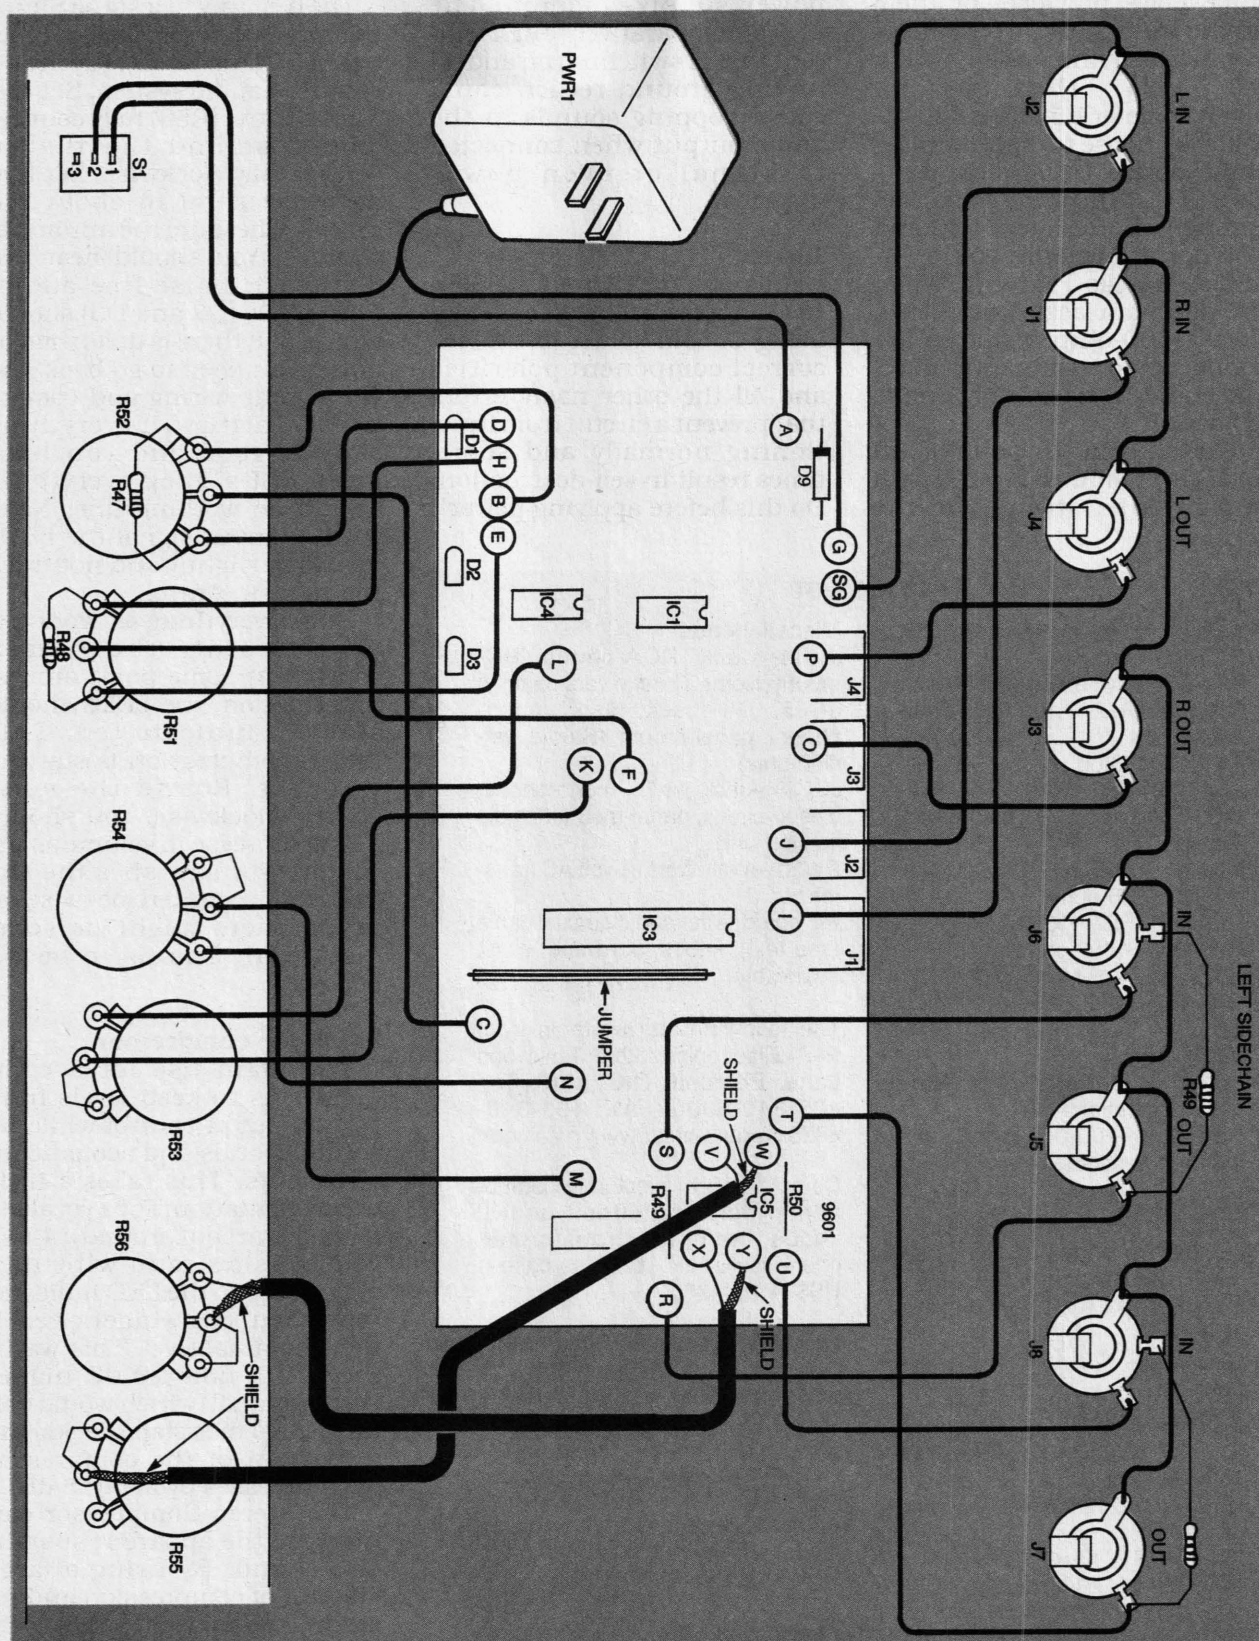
INTERCONNECTING THE PC BOARD with the front and rear panel parts is simplified by PC board circled markings. The long cable runs from the board's output stage to two front-panel controls, which requires using thin, flexible, audio, coaxial cables such as the RG-174/U type. The unit's step-down power transformer PWR1 is contained in a wall-plug casing that plugs into a power outlet.
